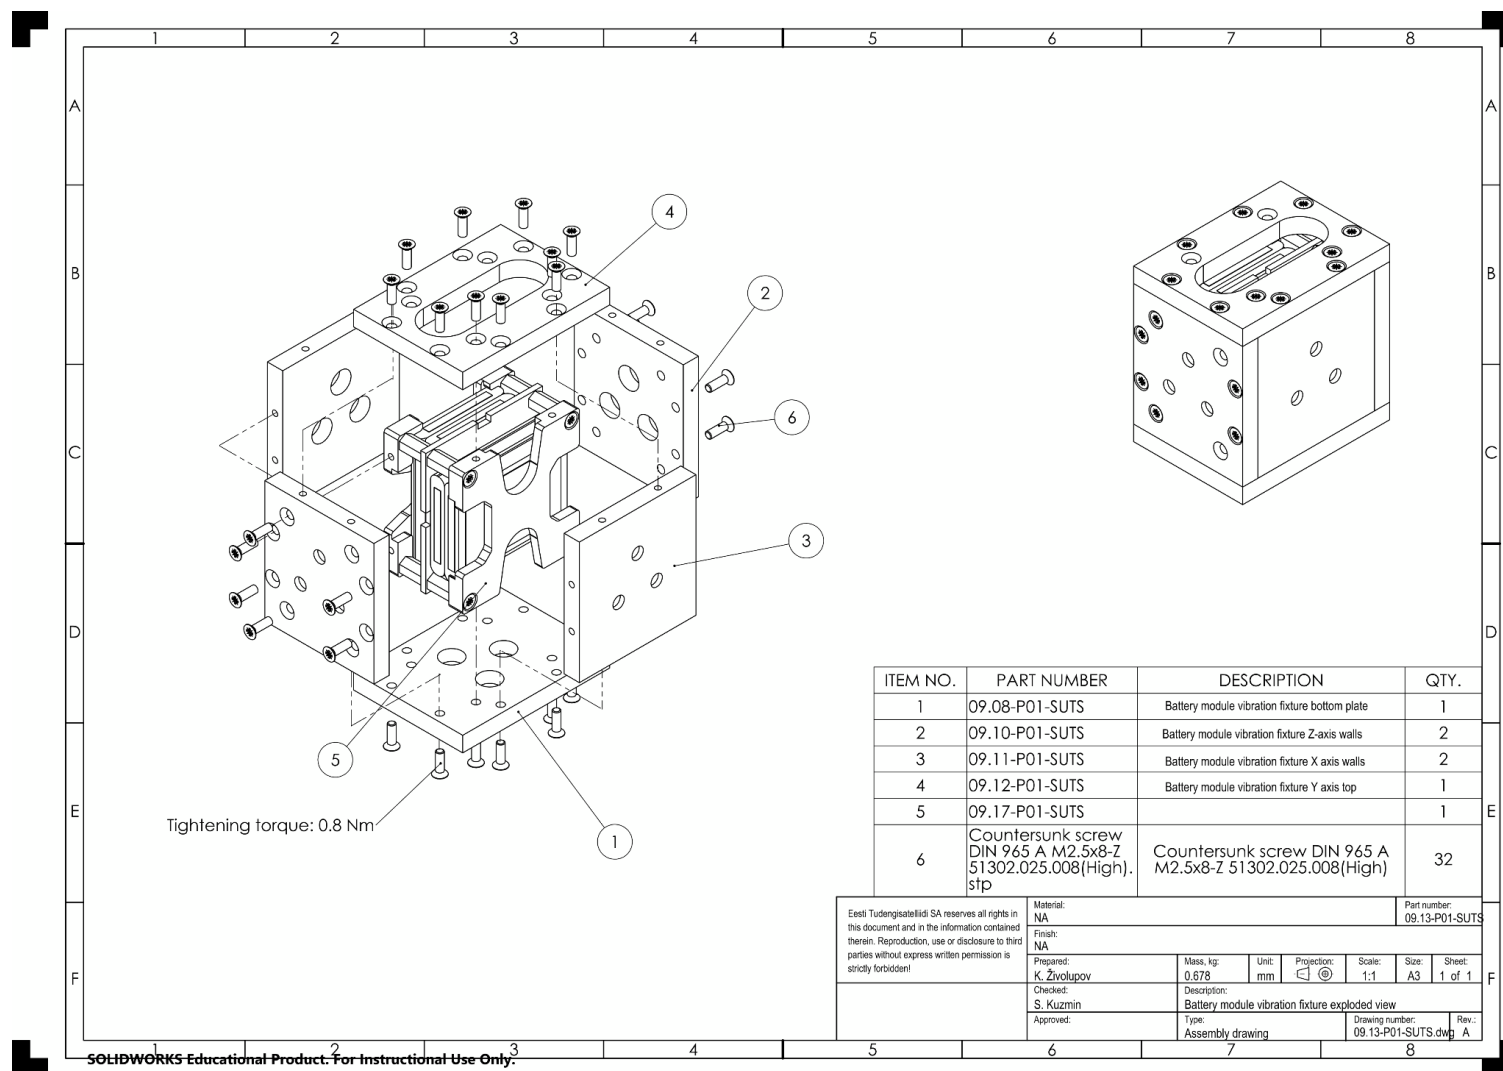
Technical drawing of vibration jig assembly 09.13-P01-SUTS
